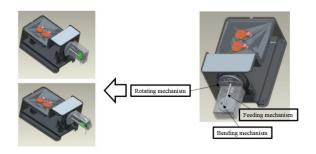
CNC dental wire bender consists of a feeding mechanism, a rotating mechanism, and a bending mechanism.
